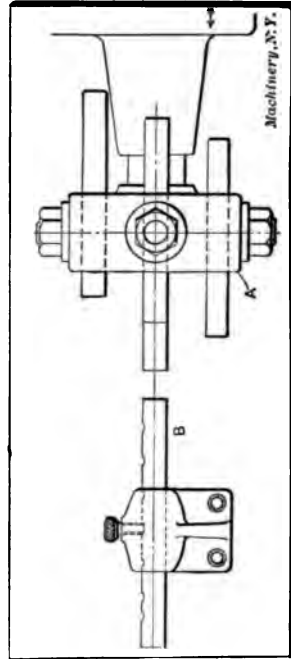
Rotating Dead Stops used on a Turret Lathe Cross-slide
